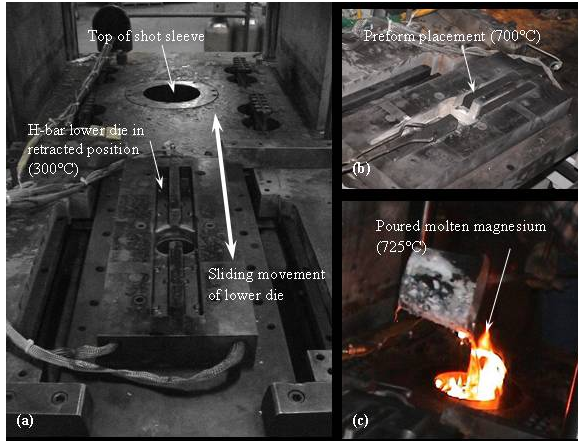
(a) Squeeze casting equipment with an H-bar die with (b) preforms inserted. (c) molten magnesium poured into shot sleeve.
